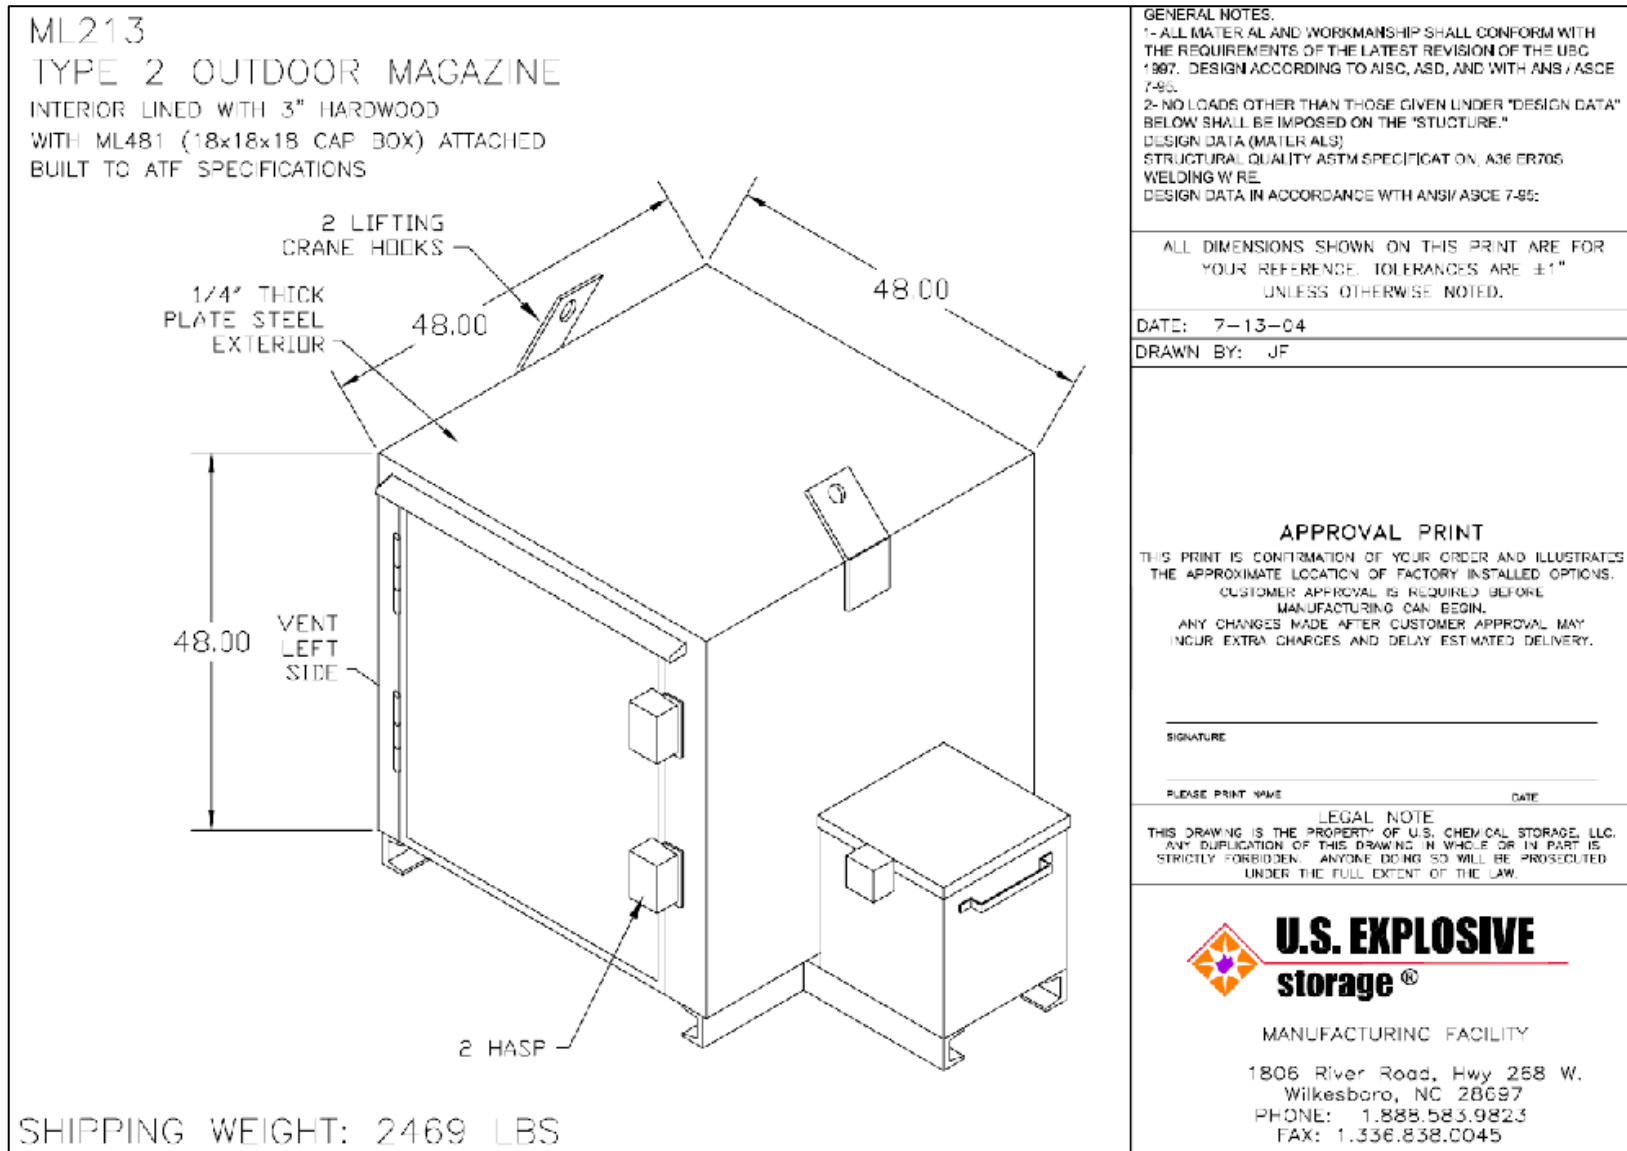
Portable Explosive Storage Magazine Design Drawing
